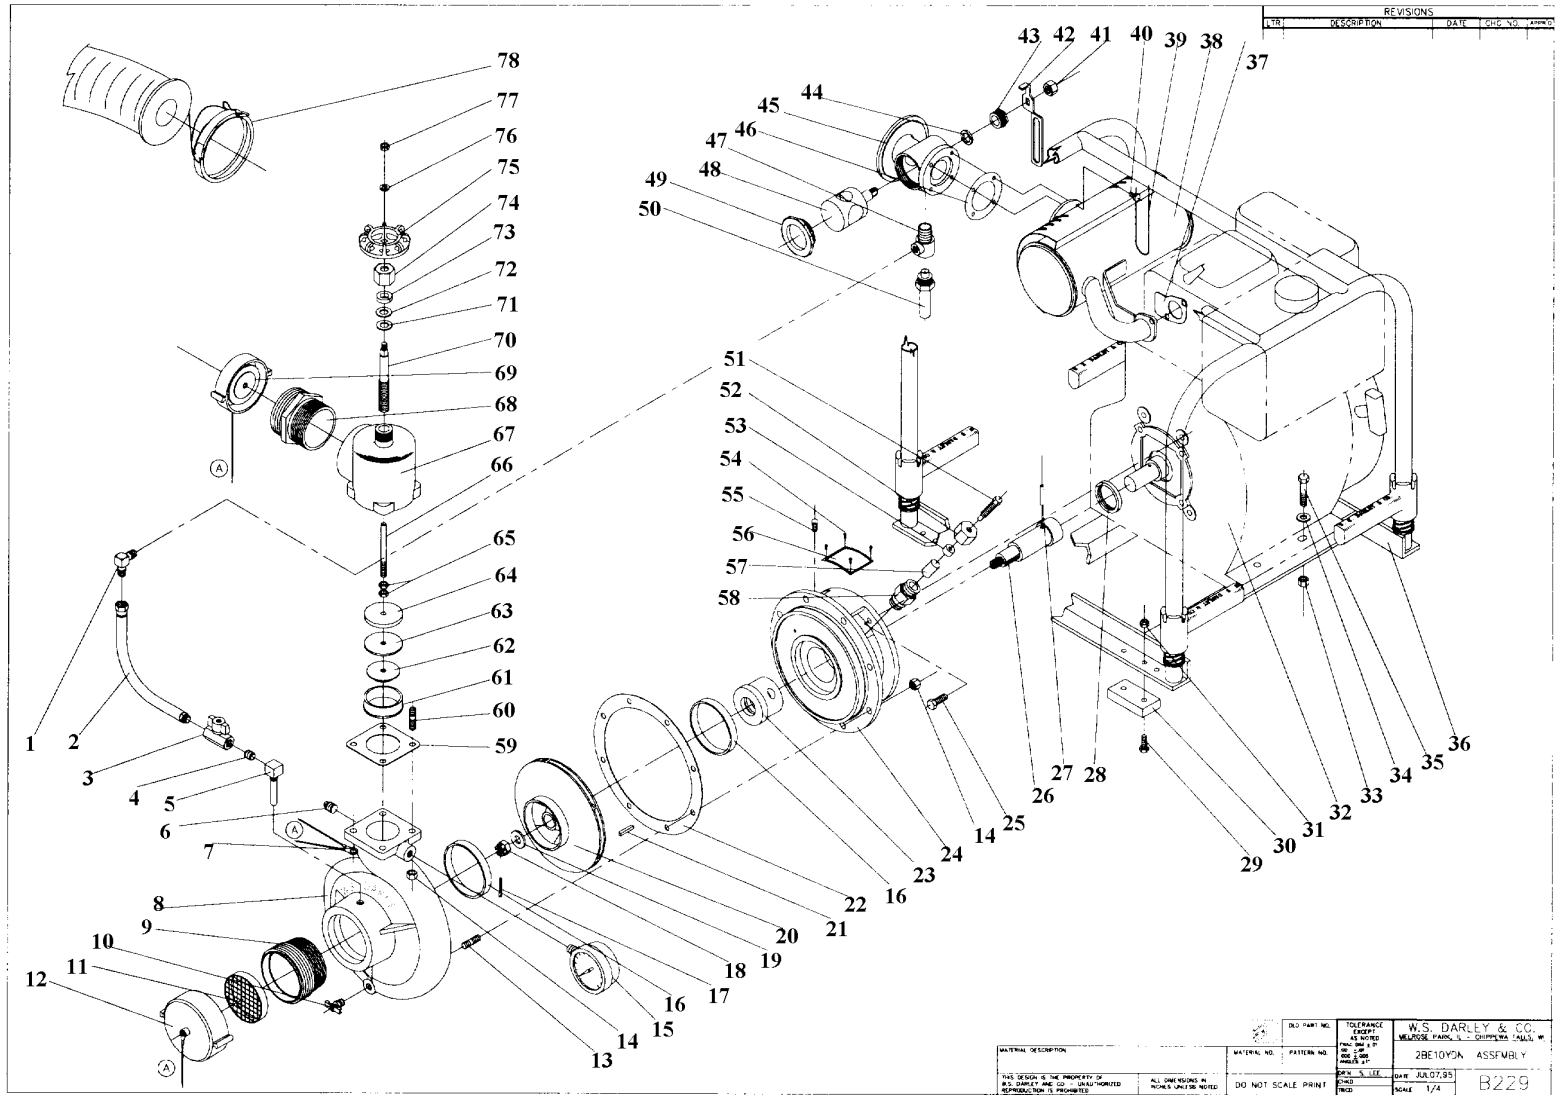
PUMP UNIT EXPLODED VIEW (DRAWING B229)
